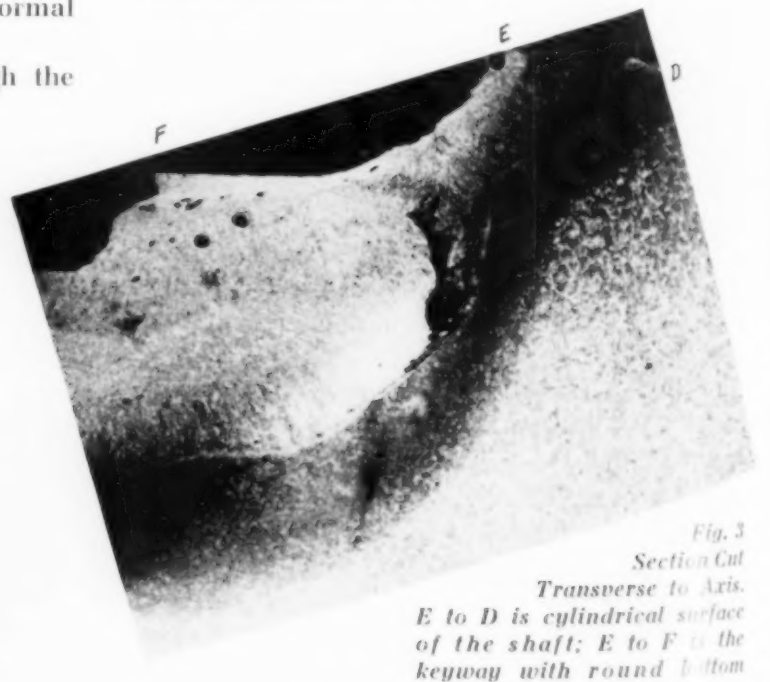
Section Cut Transverse to Axis. E to D is cylindrical surface of the shaft; E to F is the keyway with round bottom
